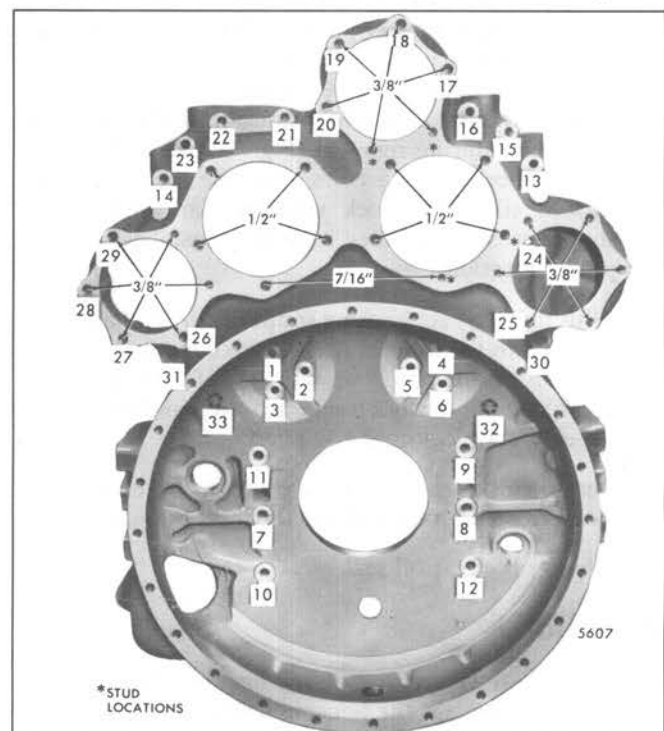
Flywheel Housing Bolt Tightening Sequence
